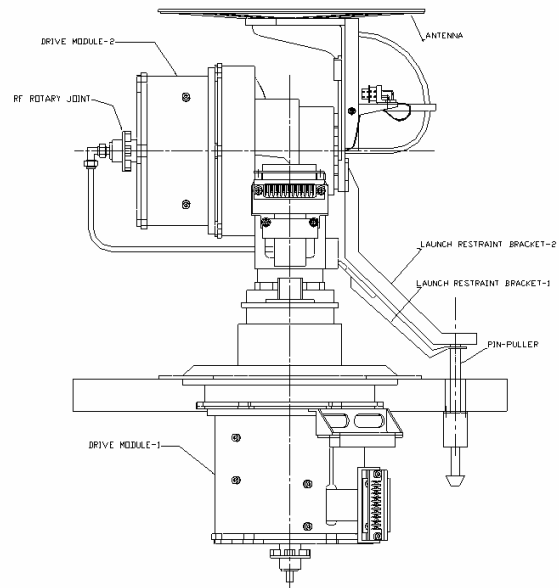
Overall configuration of DGA mechanism. It shows two orthogonal axes drive labeled as Drive module-1 and drive module-2 with Planar Antenna.
